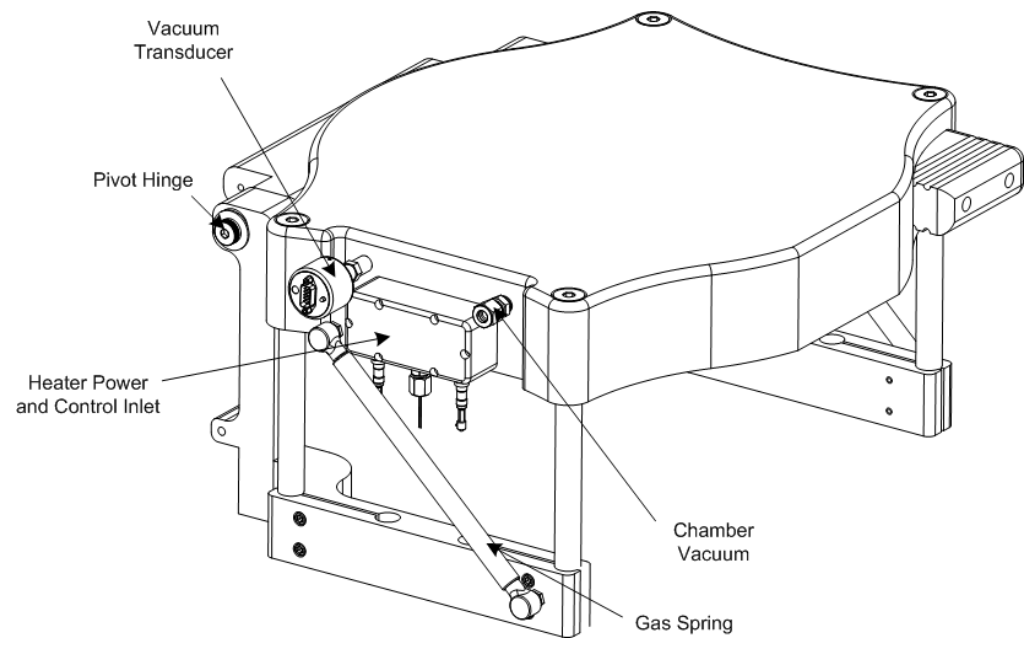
Apogee™ Upper Chamber Assembly (Rear)
